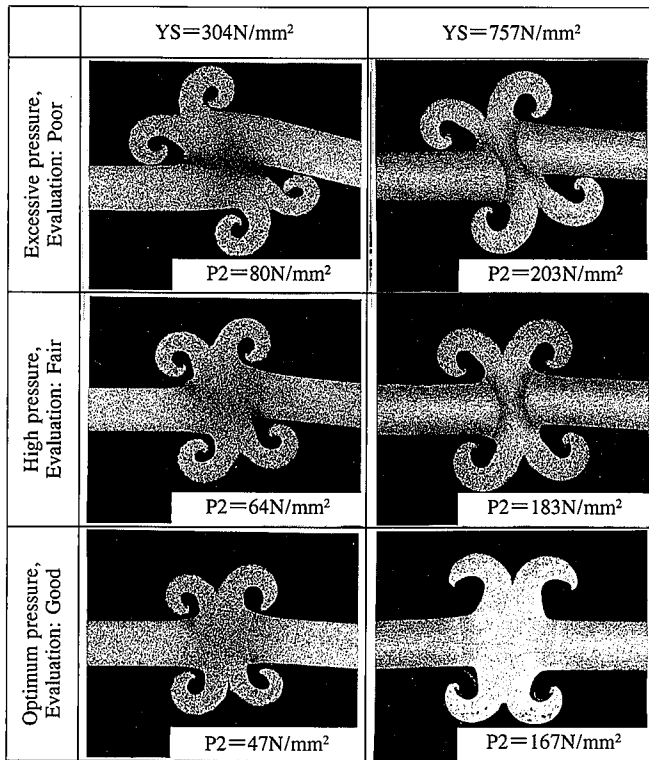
Cross-sectional shapes of friction welds in thin-walled tubes (75.0 mm ϕ \times 1.6 mm t, t/D = 0.021)
